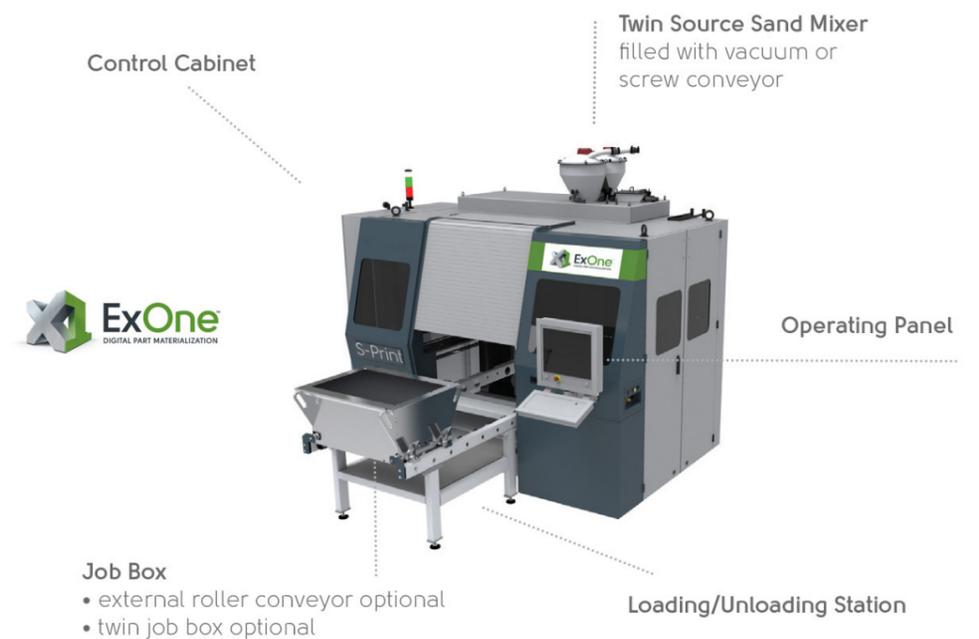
e: ExOne printer- used for printing moulds by 3Dealise depicting different elements of the printer
